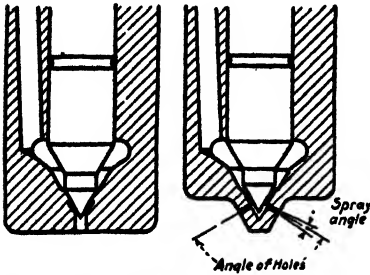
Single-orifice nozzle and multi-hole nozzle.
